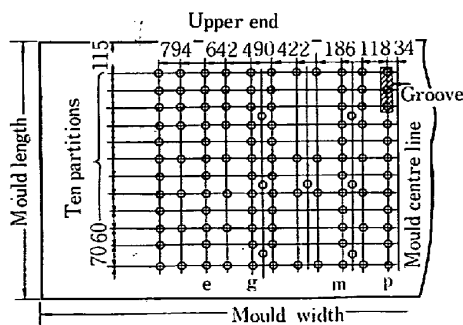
Allocation for thermocouple holes for temperature measurement in copper mould. (unit : mm)
